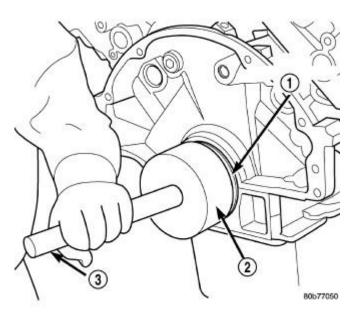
Identifying Special Tool 8349-2 And Crankshaft Rear Oil Seal Courtesy of CHRYSLER LLC
